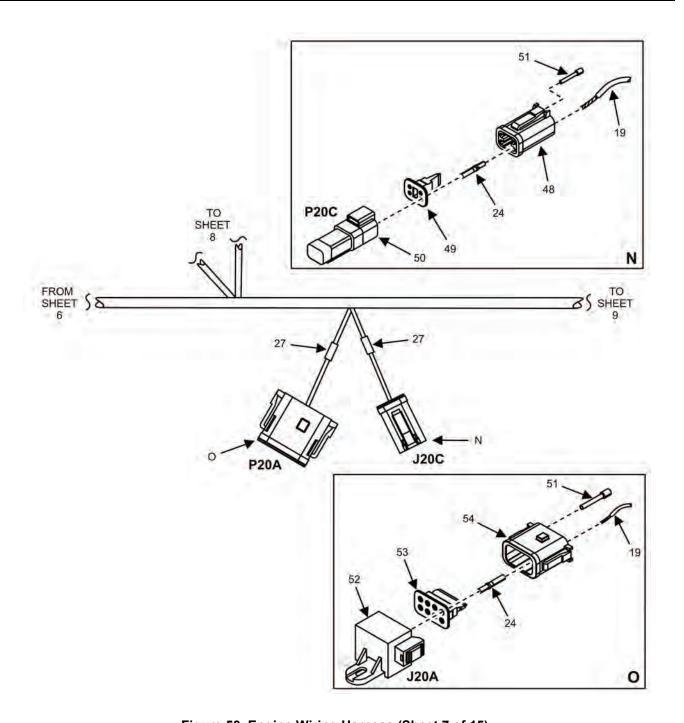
Engine Wiring Harness (Sheet 7 of 15).
